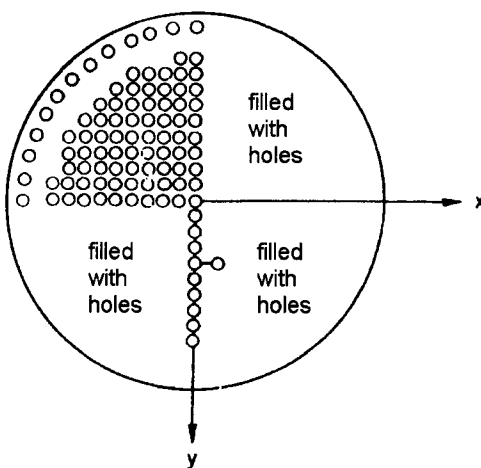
Tube sheet from heat exchanger [2.2].
